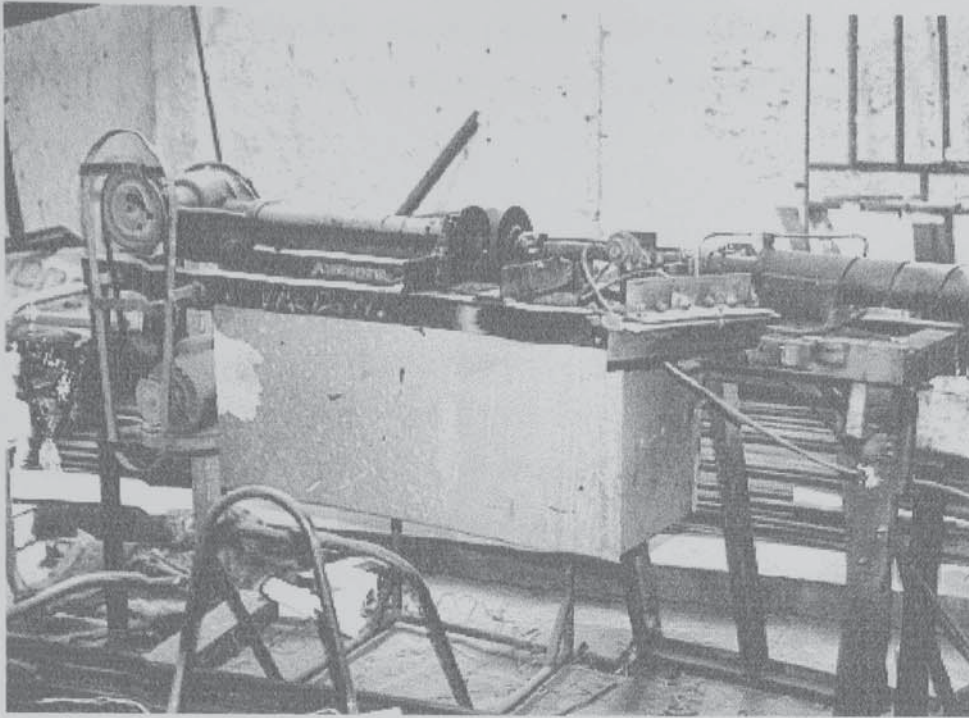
Alternative wire net manufacturing machine constructed from automobile parts.
